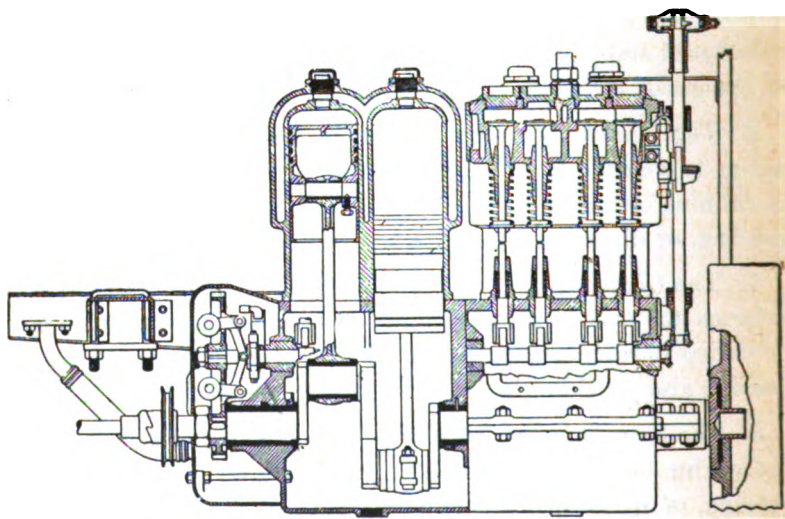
PART SECTIONAL ELEVATION OF THE PACKARD FOUR-CYLINDER ENGINE.
